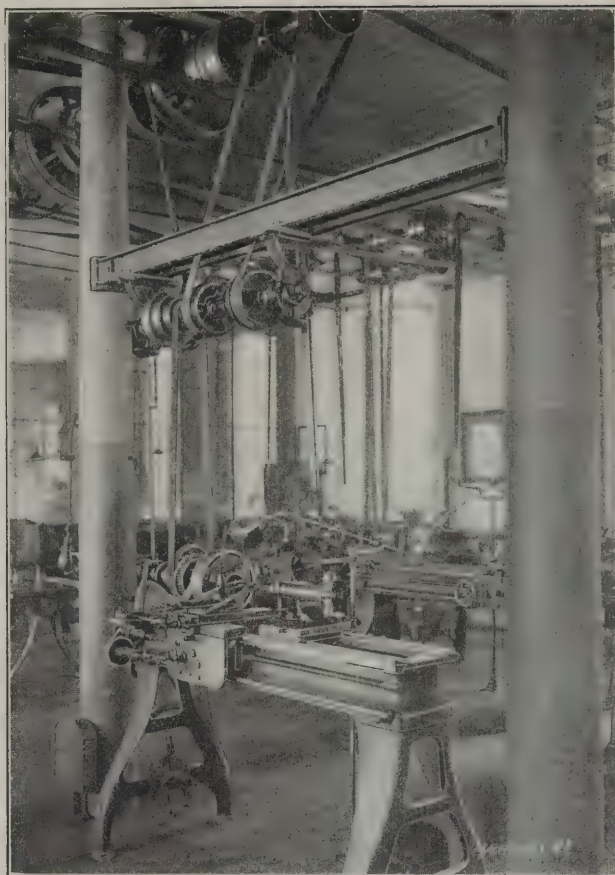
Engine Lathe beneath Lineshaft and driven by Short Belt from Countershaft.
